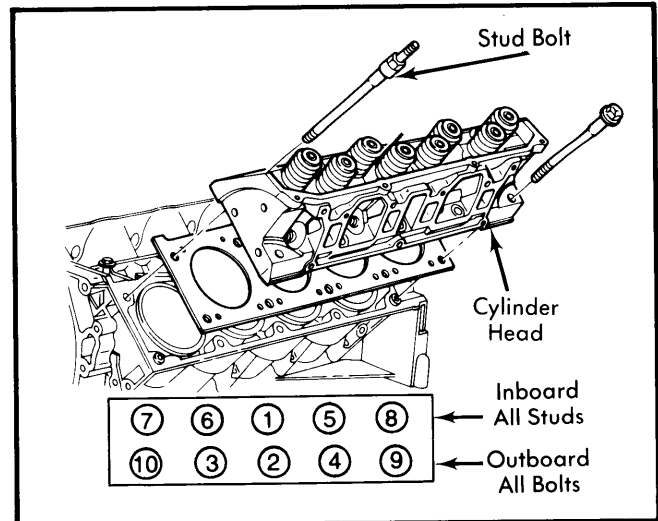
Cylinder Head Bolt Location and Tightening Sequence
